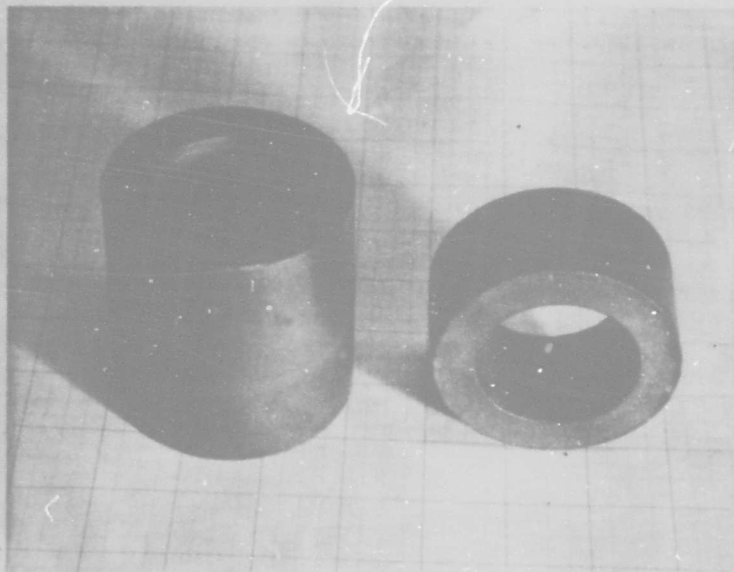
3-in. o. d. JTA Hollow Cylinders Made by Baking and Hot-Pressing Without a Supporting Mandrel.
